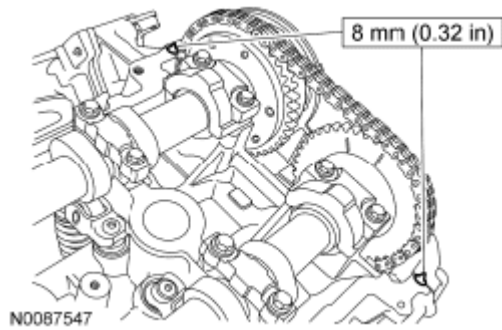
Applying Dot Of Silicone Gasket Sealant To Front Cover-To-Cylinder Head Joints
